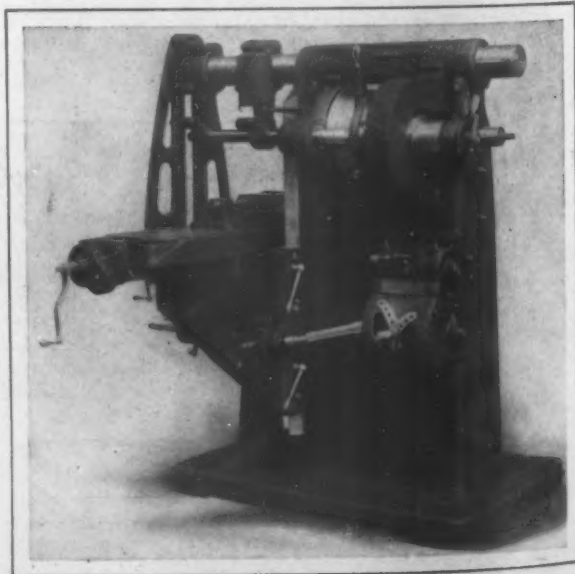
The No. 4 Heavy Duty Cone Type Milling Machine Built by the R. K. Le Blond Machine Tool Company, Cincinnati, Ohio
